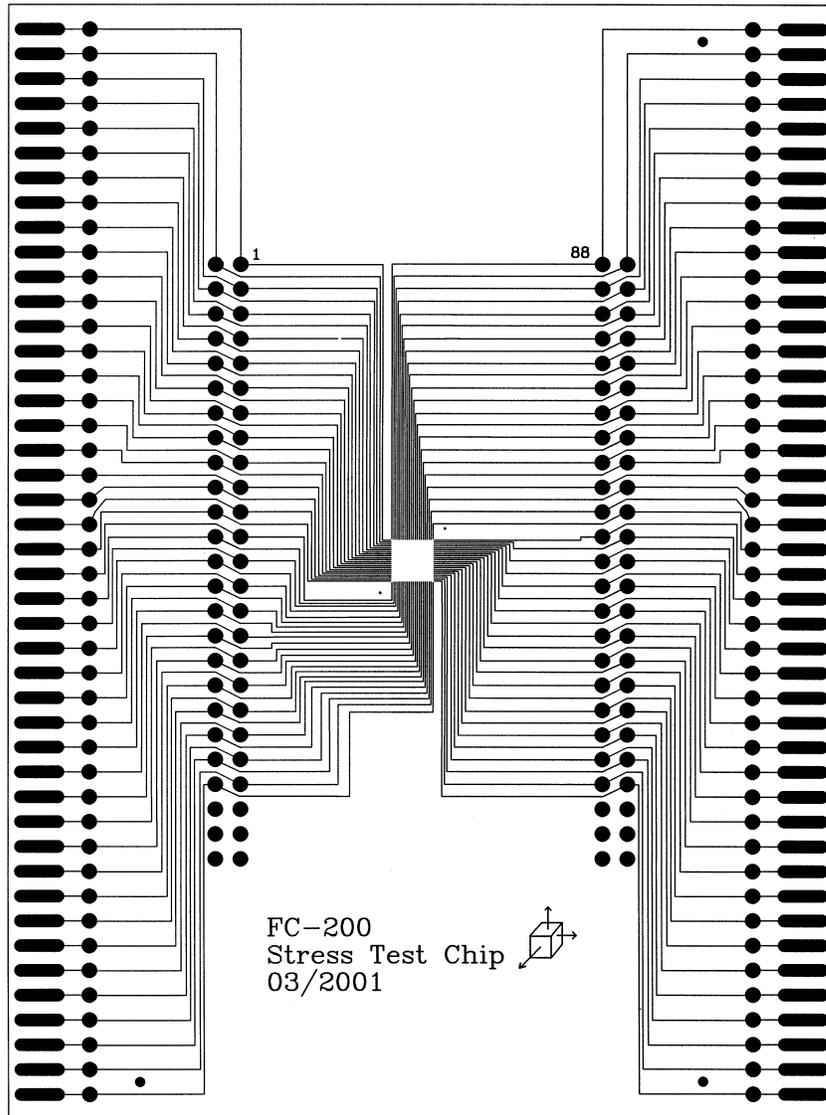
PCB Design Layout for FC200 Flip Chip Assembly
